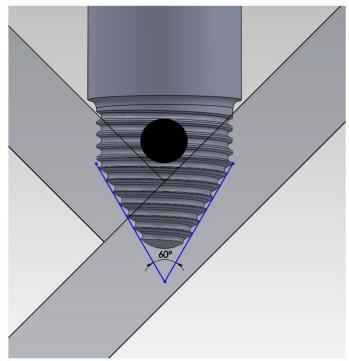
The picture shows the 60 degree angle of the Probe tip. The black circle represents the weld wire. The flat surface above the threaded area is where the sliding contact to the Shoulder will occur. The weld pieces of tee weld can be seen in transparent
